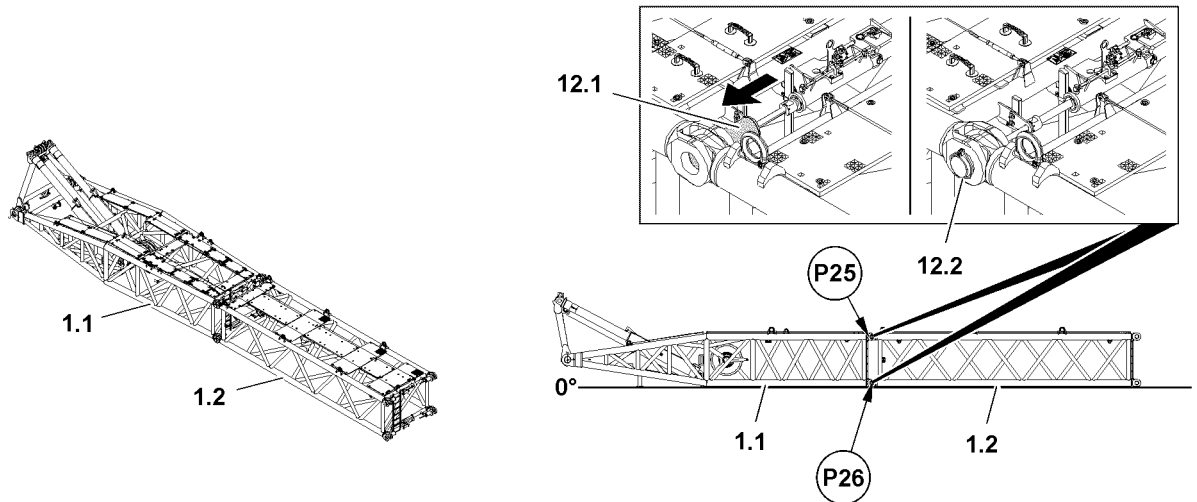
Disassembling of the WA-frames — Unpinning the WA-frame pivot section on the WA-frame intermediate section
